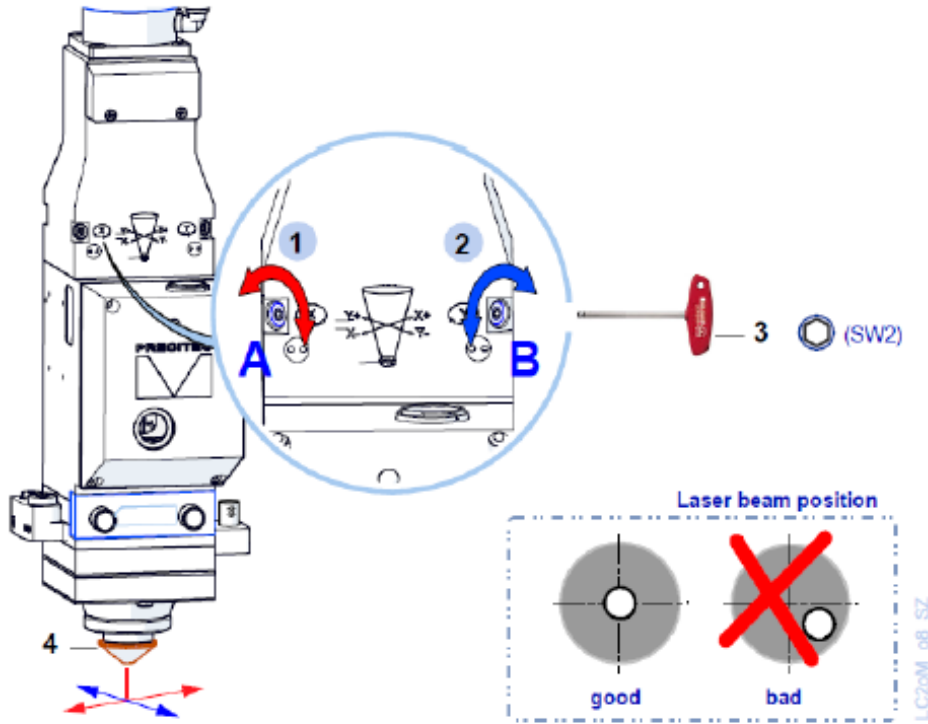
Commissioning: Laser beam position - Focusing lens
